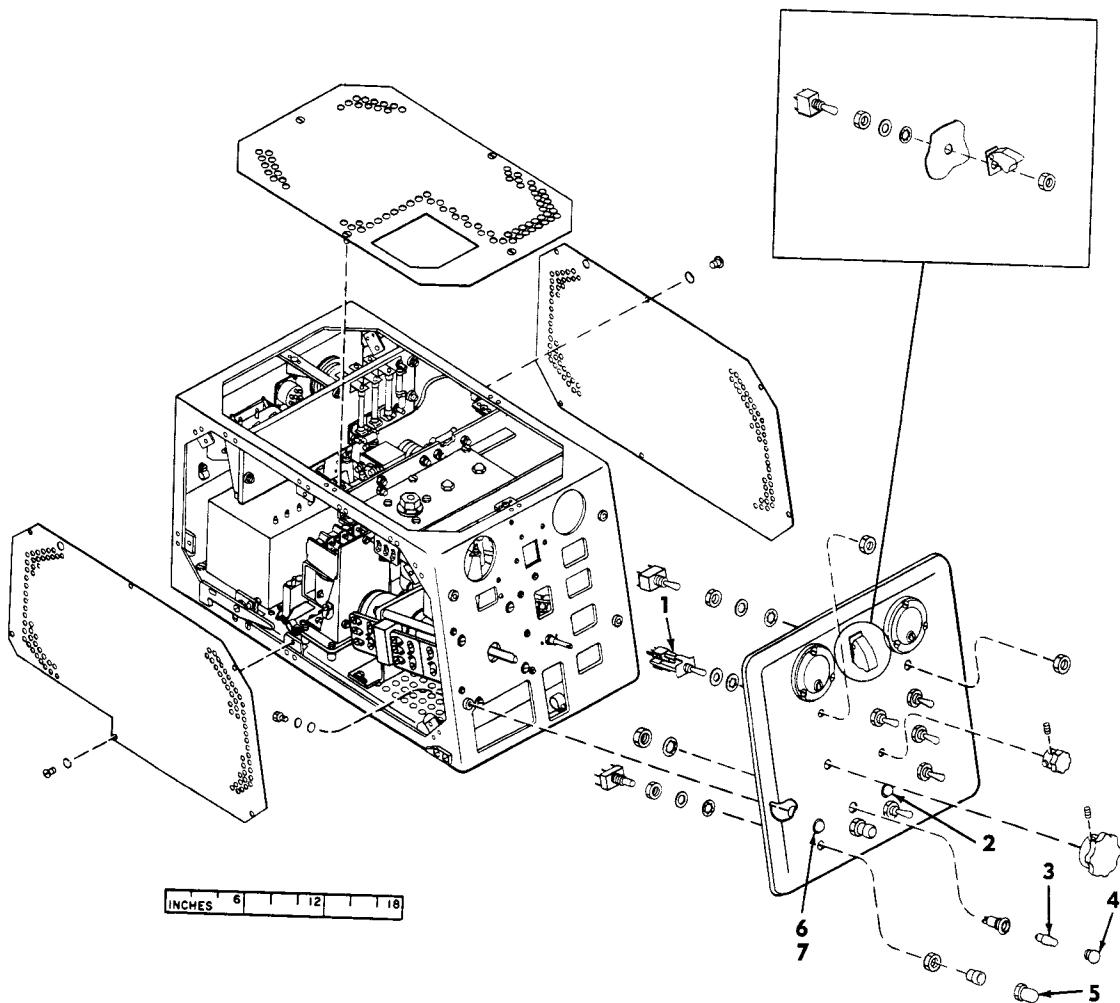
Amplifier, electronic control (9156311)—partial exploded view
